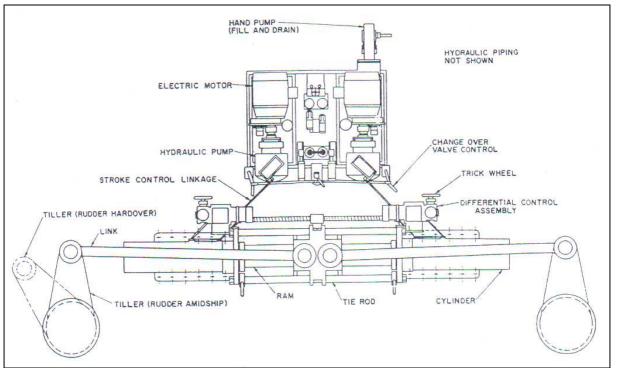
Articulated rod or link type steering gear for a twin-rudder ship.
